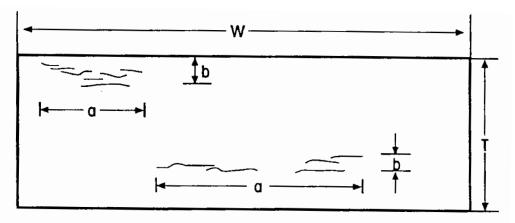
Test Specimen and Crack Dimensions to Be Used in Calculating CSR, CLR, and CTR
